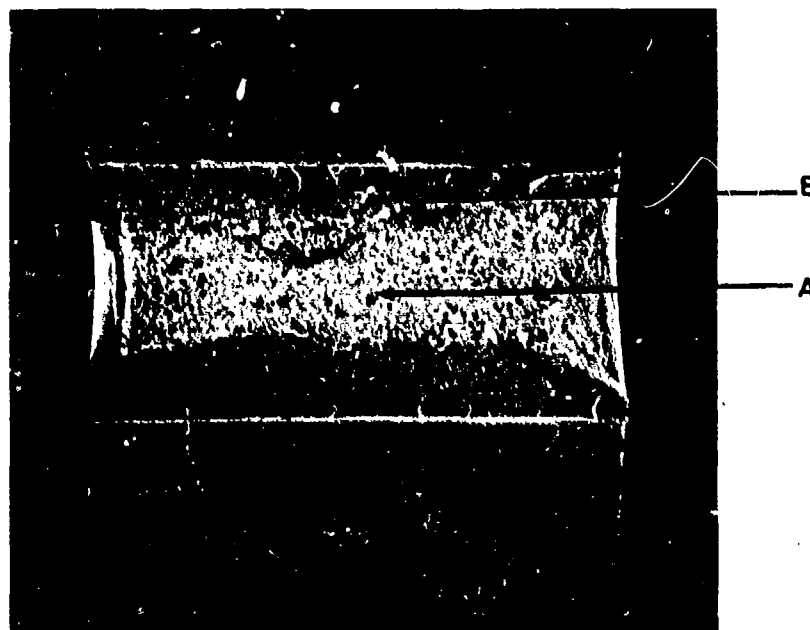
Fatigue fracture surface of a temper-embrittled A-514 weld specimen. 11x.
